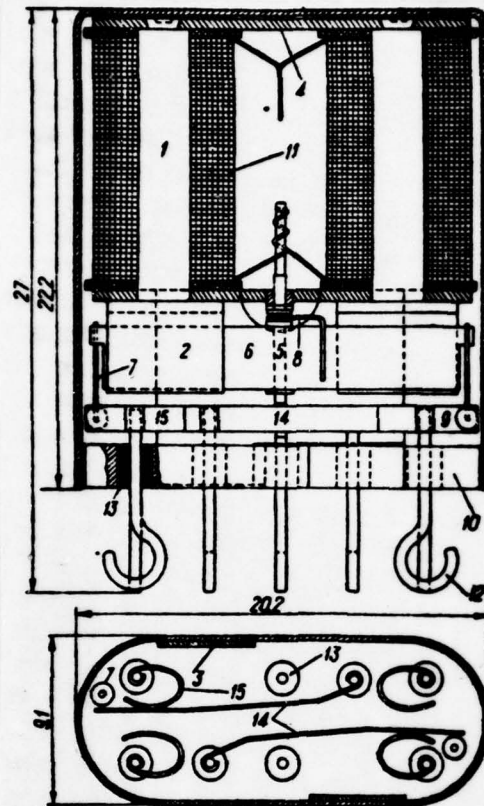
Relays of series MV. 1 - core; 2 - pole, 3 - clamp of the attachment of magnetic system; 4 - closing plate of magnetic circuit; 5 - axis of armature; 6 - armature; 7 - pusher of armature; 8 - return spring; 9 - travel limiter of armature; 10 - socket (base of relay); 11 - coil; 12 - leading-out hook; 13 - insulating glass insulating beads; 14 - movable contact spring; 15 - motionless contact spring.
